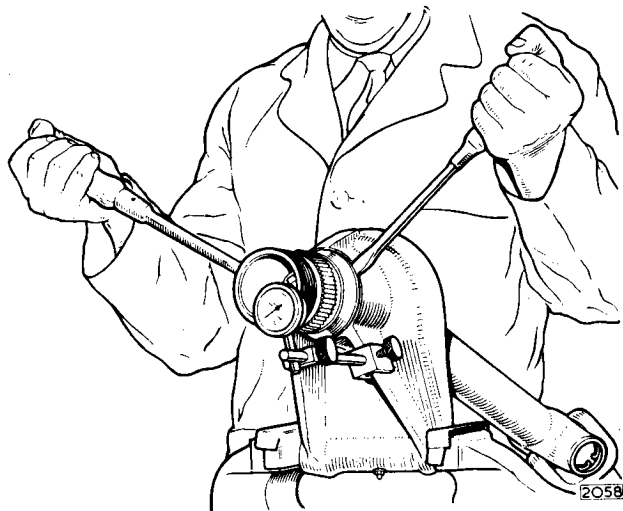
Checking the hub bearing end float with a dial test indicator (Churchill Tool No. J.13). The hub must be tapped inwards before taking a reading
